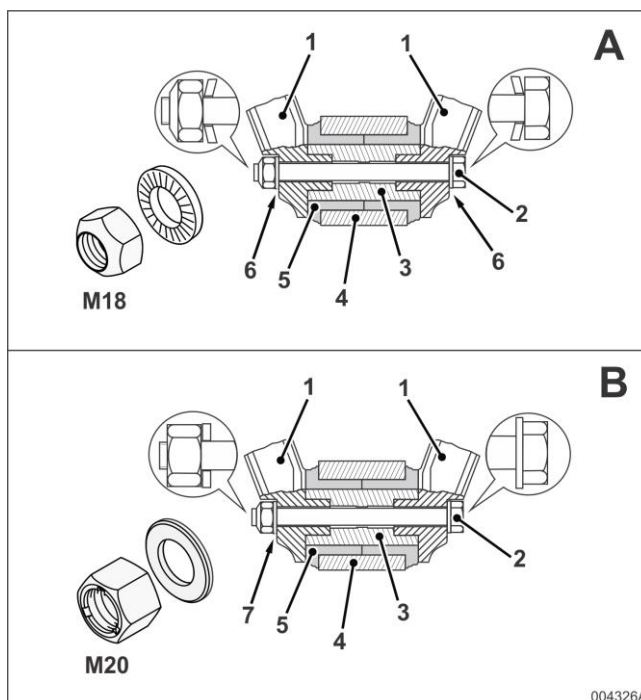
Articulation joint, steering knuckle carrier/hub carrier side
